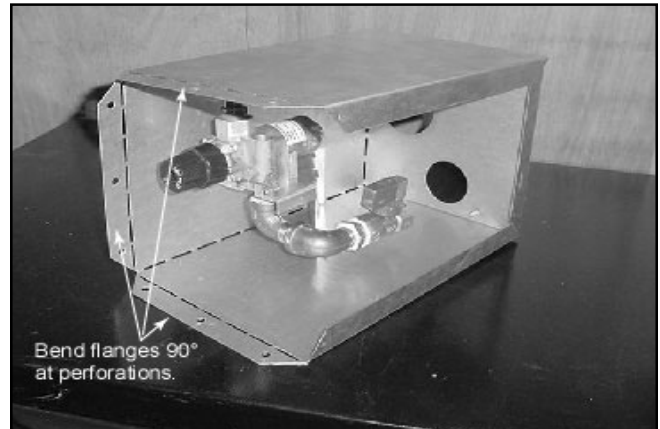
Remove Right Side of Valve Box & Bend Flanges
